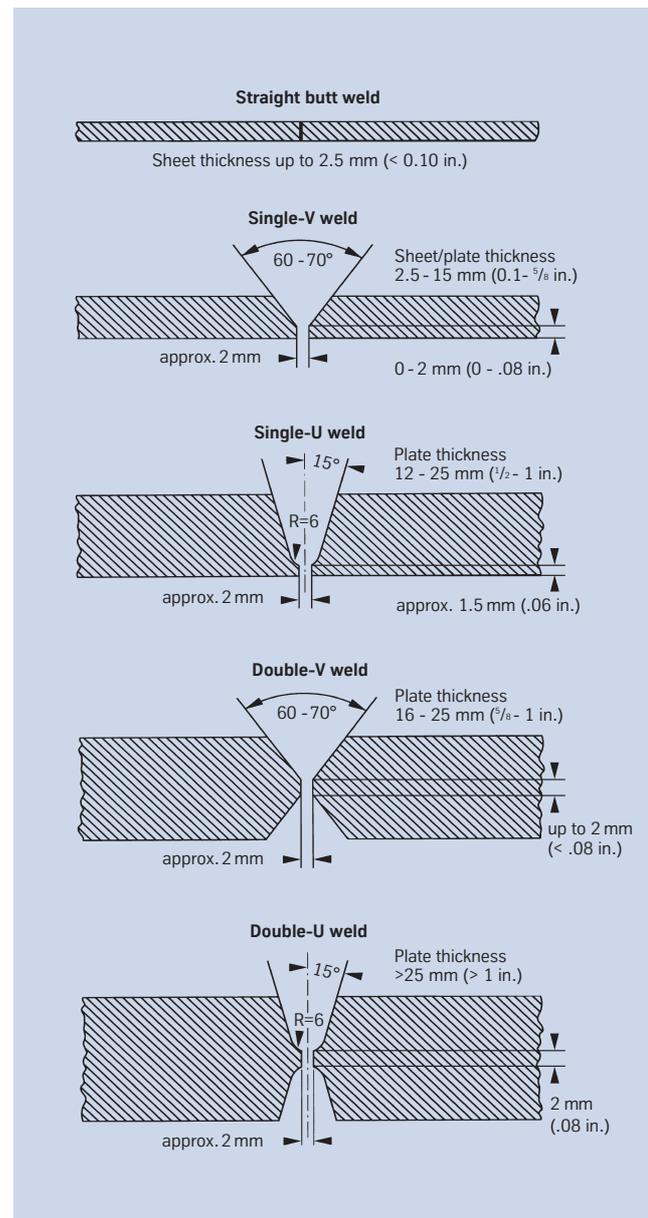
Edge preparation for welding of nickel alloys and special stainless steels.
